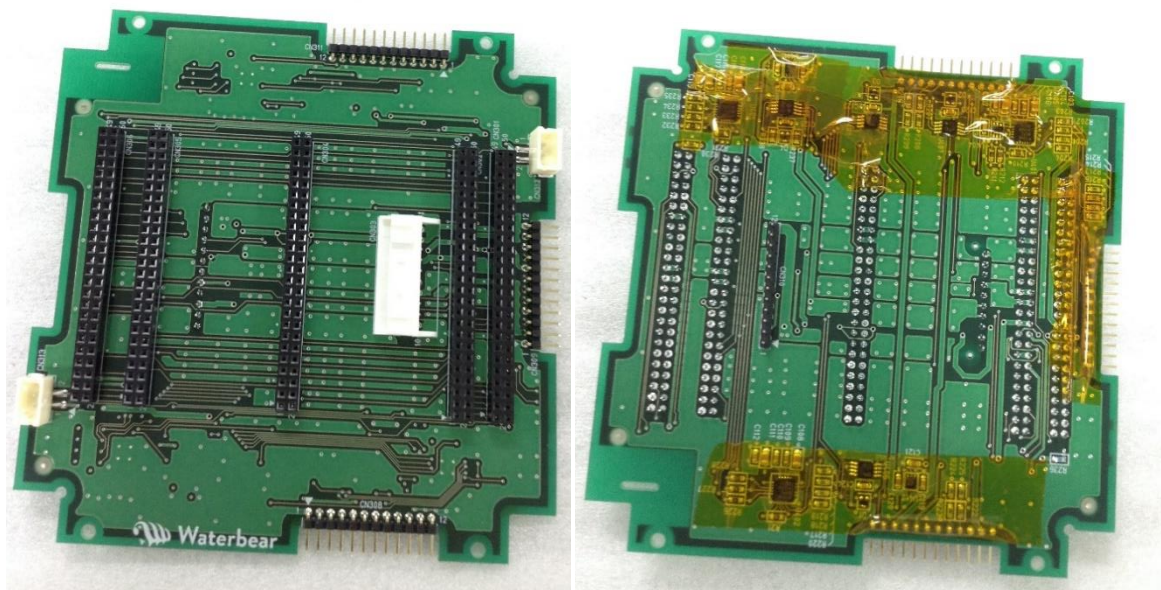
Backplane board of the BIRDS-1. Top view (left), bottom view (right).
